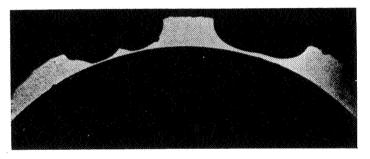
Water side corrosion of a fire tube boiler just beyond the end of the protective ferrule on the tube inlet.
